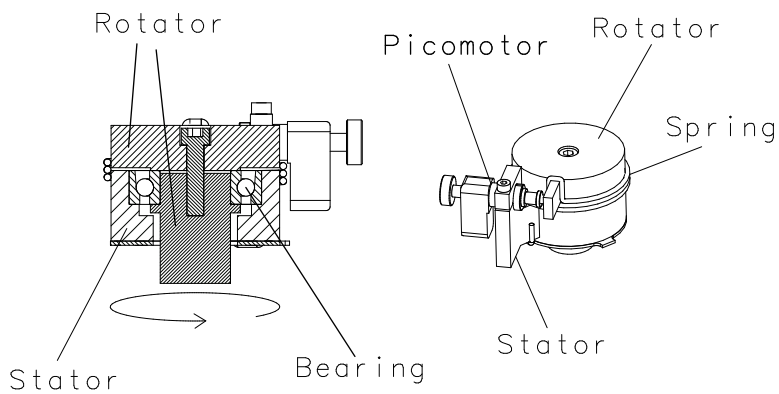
The internal structure of the rotator and the stator. A thrust bearing is used to connect them.
